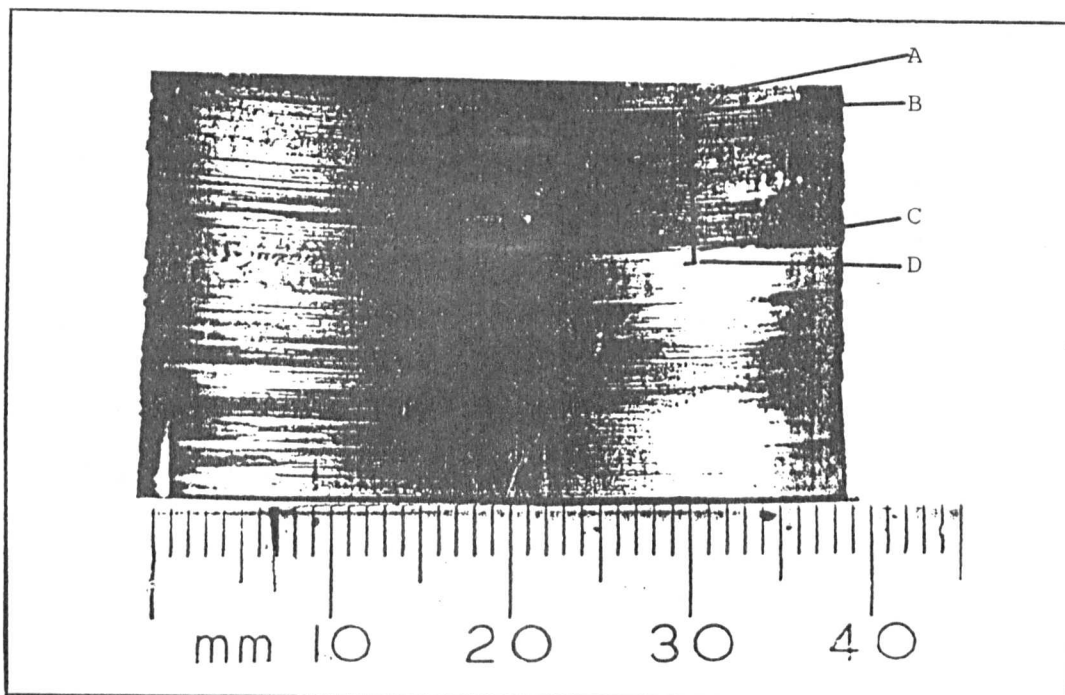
PHOTOGRAPH OF FORD DOVER CAMSHAFT BEARING CORROSION.
